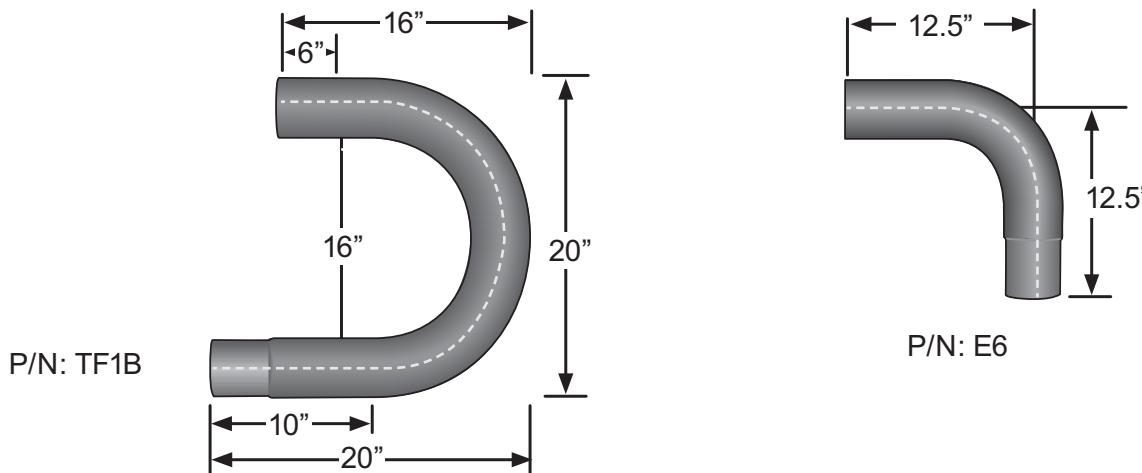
• Elbow and U-Bend ClearancesFigure 3.11 • U-Bend and Elbow Dimensions
